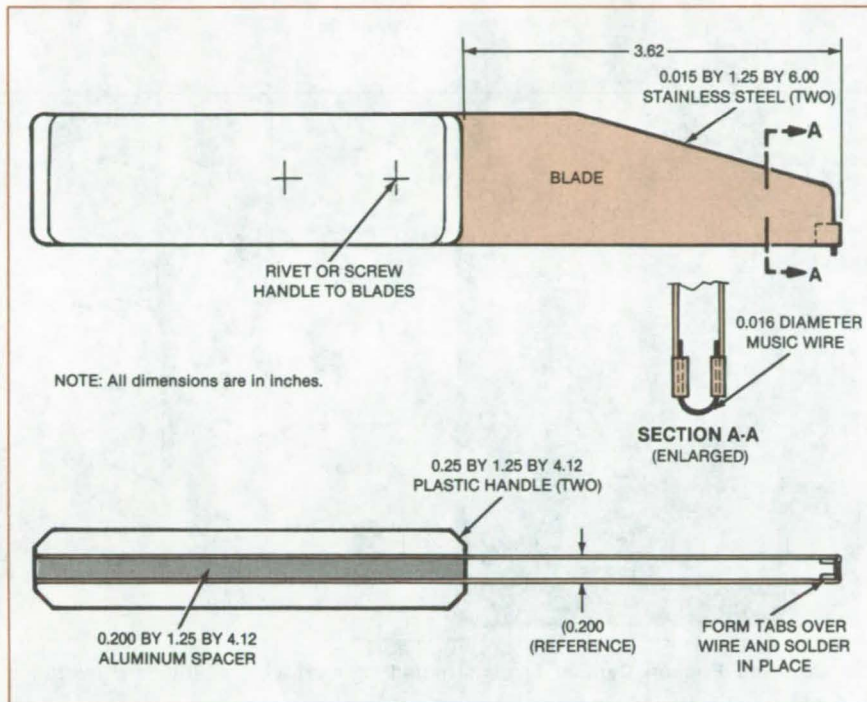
Two Parallel Blades, sandwiched between an aluminum spacer and plastic, support the cutting wire. The wire is crimped to the blades, and the handle is held together by either rivets or screws.
